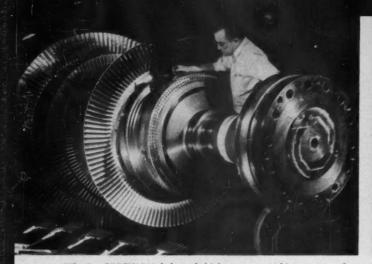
PRECISION balanced high-pressure turbine rotor—after more machining the rotor will be test run in the turbine casing.
